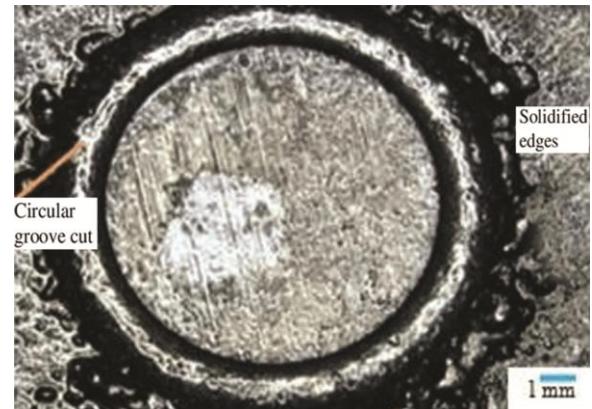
Machined EN-31 workpieces by PMND-EDM as per Taguchi L₉(OA).
